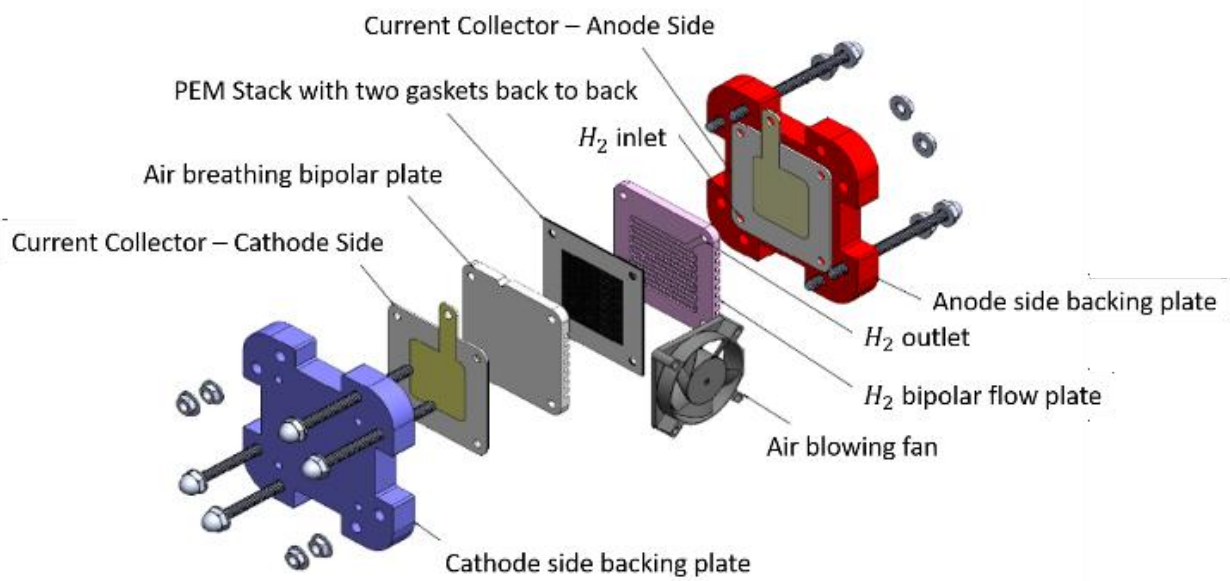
Exploded view of a Proton Exchange Membrane fuel cell.
